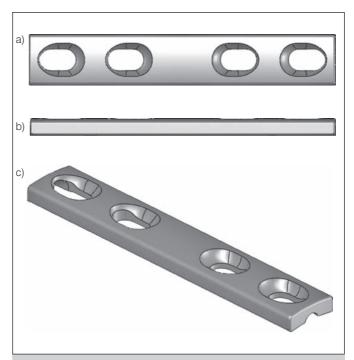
Diagram demonstrating the narrow large-fragment DCP® plate containing 04 holes. A) top view b) side view c) oblique view.
